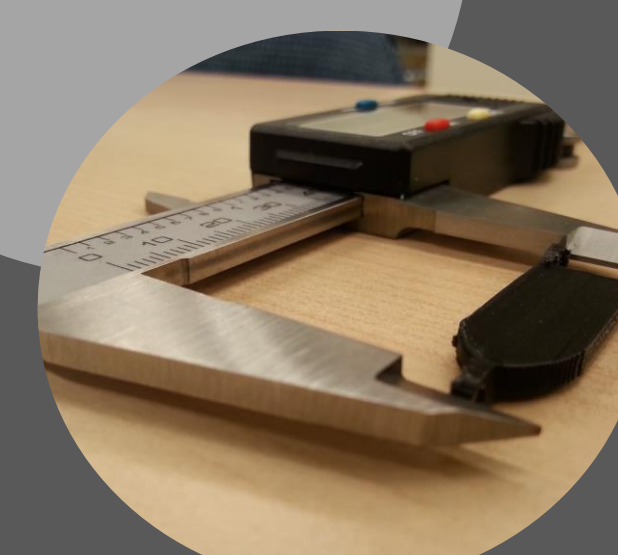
& 3: A Vernier Caliper was used to measure out dimensions of the components.
